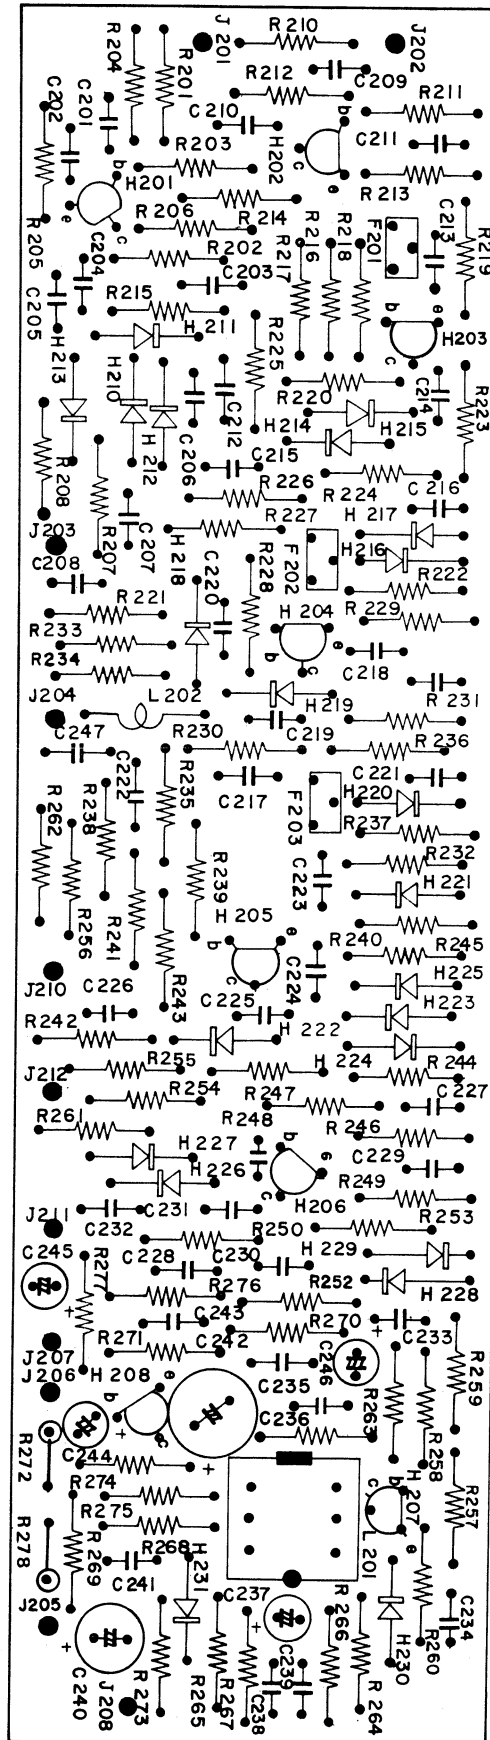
FM IF Amplifier Assembly P200 Component Locations
